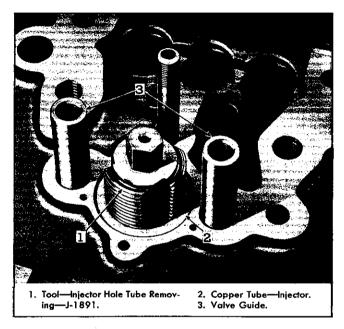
Removing Injector Copper Tube from Cylinder Head with Tool J-1891 (Operation 1).
